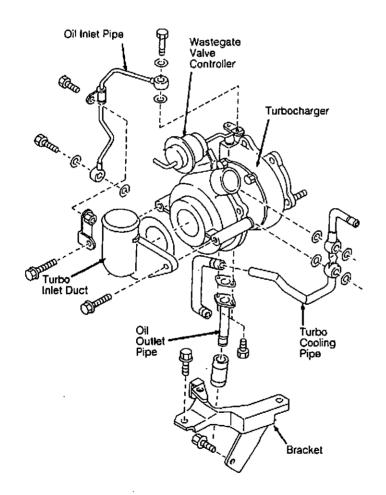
Exploded View Of Turbocharger Assembly (Legacy) Courtesy of Subaru of America, Inc.
